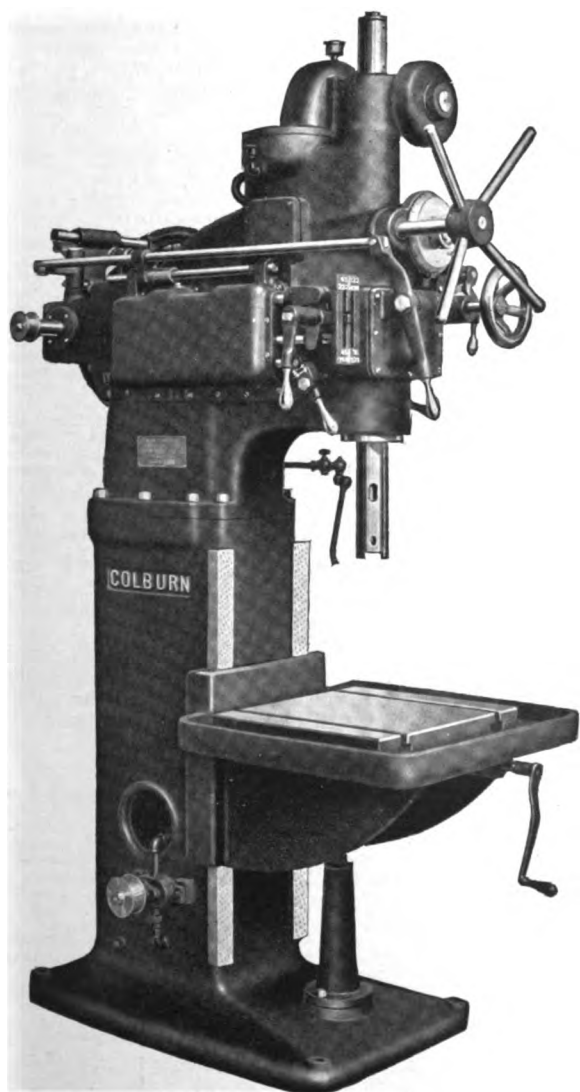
NO. 14 "STANDARD" HEAVY DUTY DRILL PRESS, 24 in. (610 mm.) SWING, WITH PLAIN TABLE
